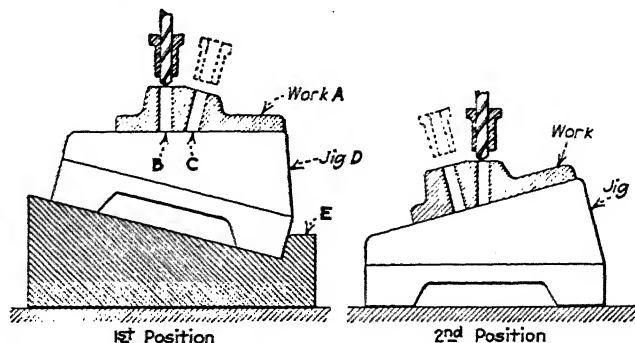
Angular Plate Used in Connection with a Simple Jig
